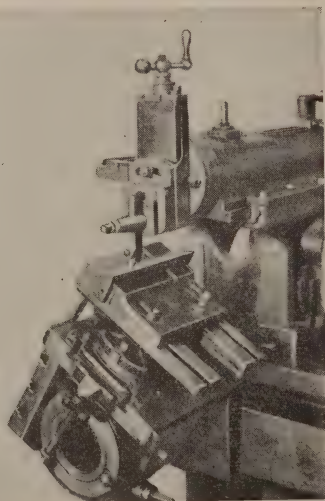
Shows universal table. In this manner the beveled surface may be planed with regular power feed.
